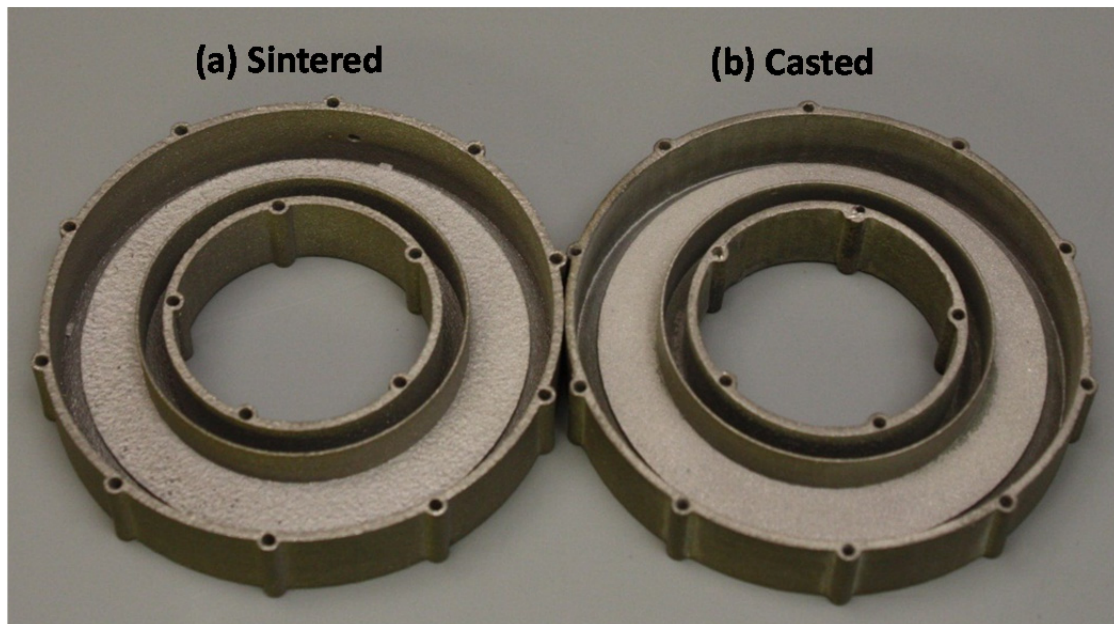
Con6 stainless steel parts. (a) Sintered, (b) Casted.
